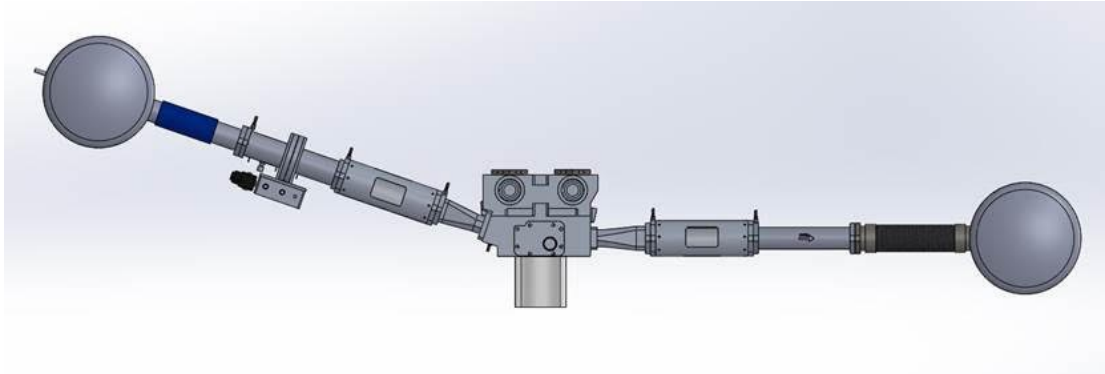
Single-cylinder engine with intake and exhaust plenums and ducts [24].
